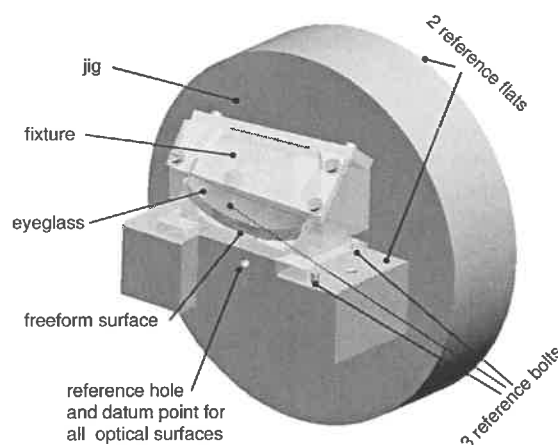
Jig, fixture, and eyeglass built as one unit during all processes
